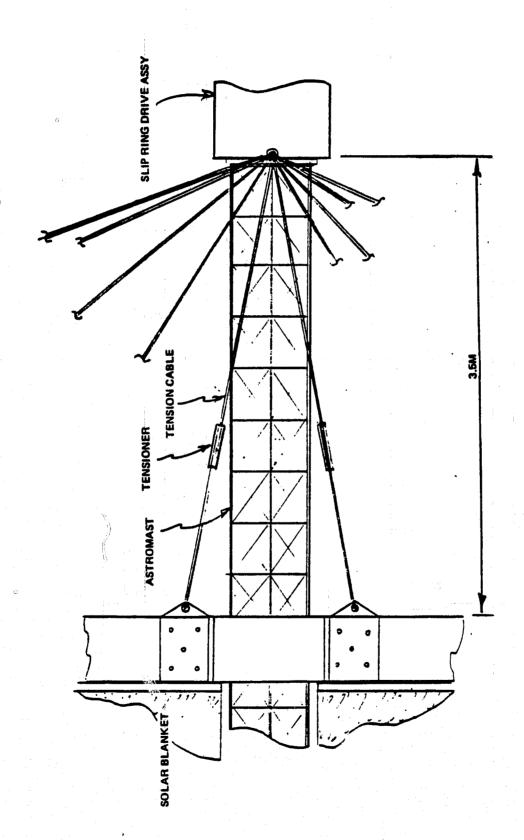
INTERMEDIATE STIFFENER RIB COLLAR DETAIL
